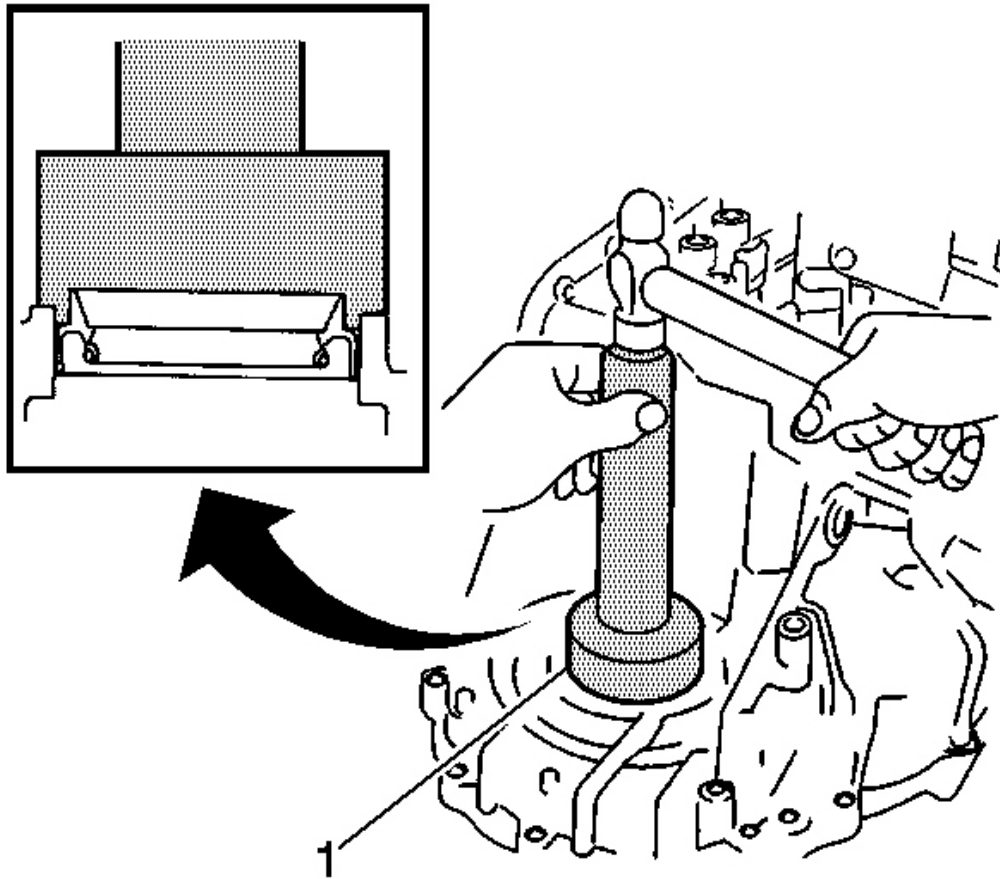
Driving In A Transaxle Case Oil Seal Using A Hammer & DT 46471
